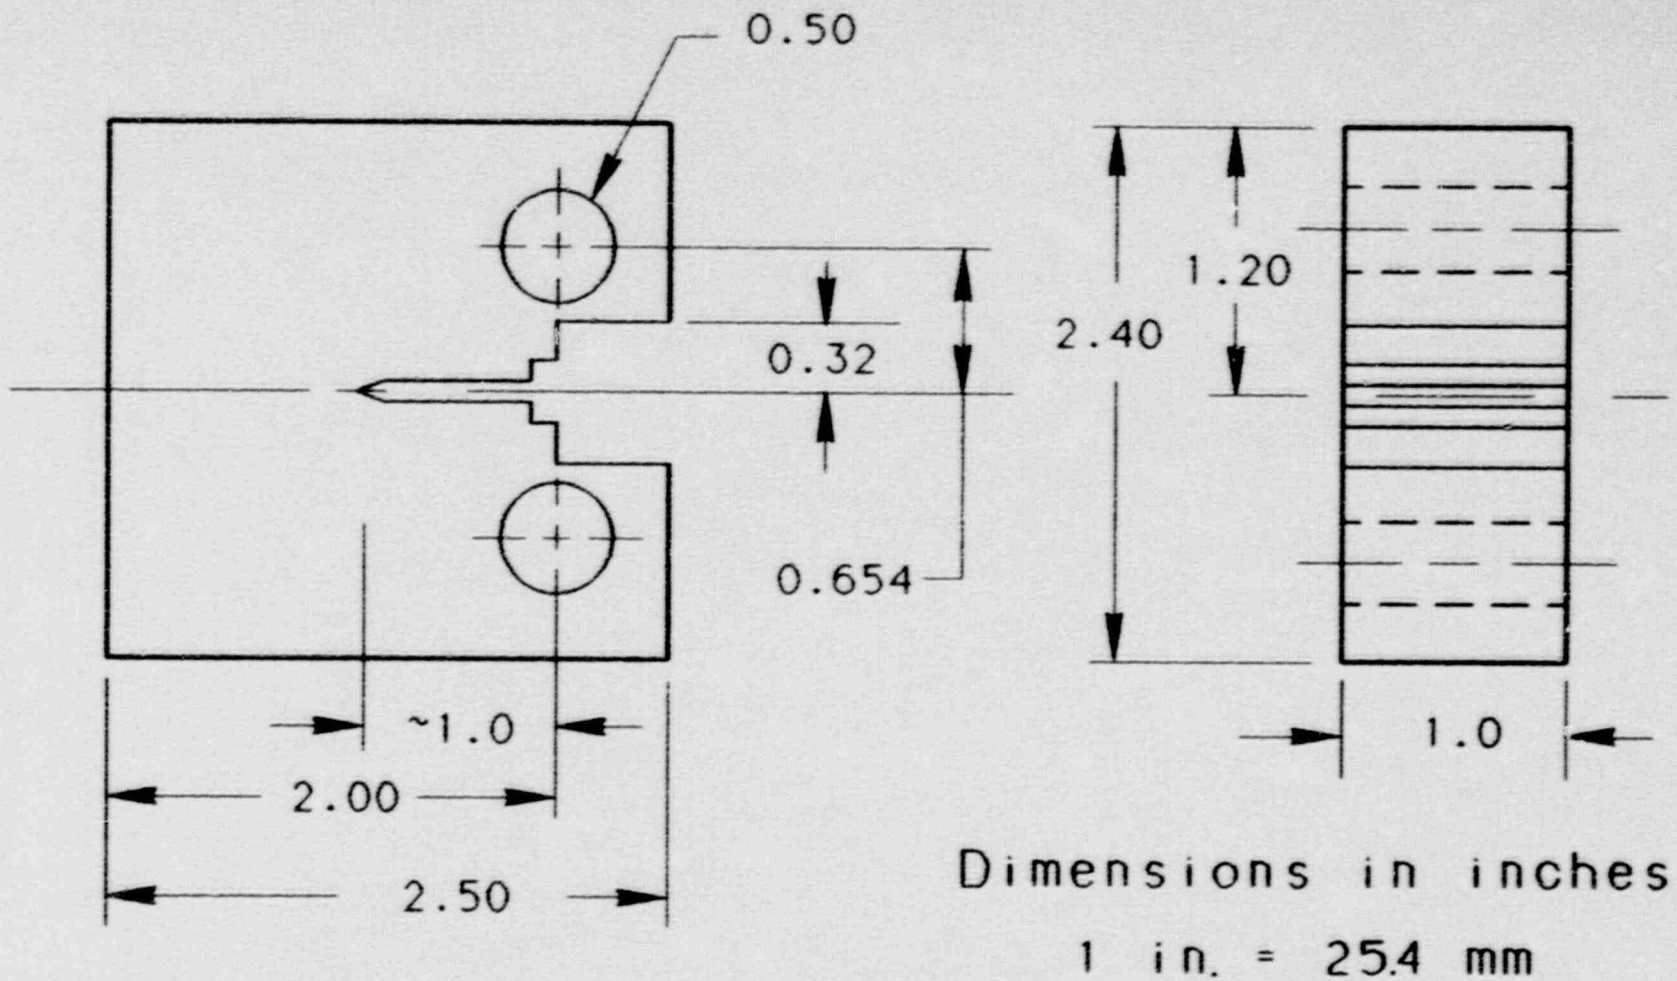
Fracture toughness tests of SA 182 Type 304 (Heat ZP6) used this IT-CT specimen design.
